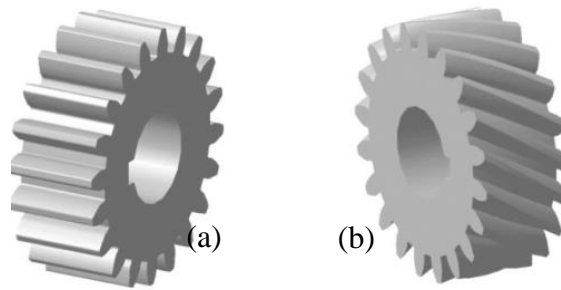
Model of involute (a): spur gear (b): helical gear [31]
